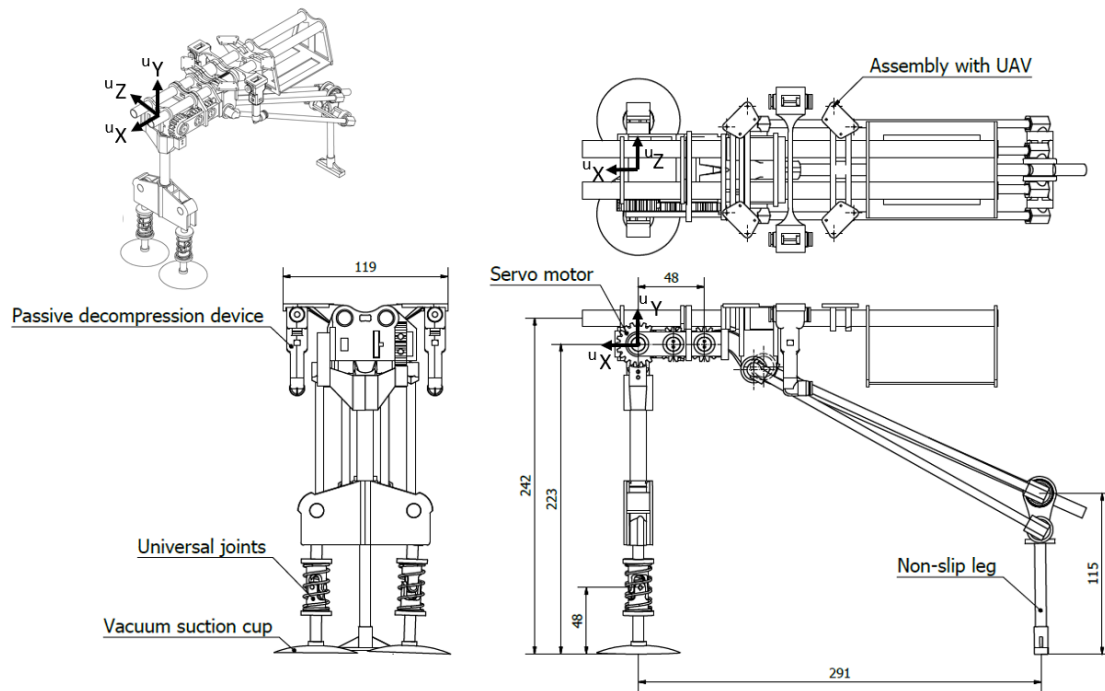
The CAD drawing of the robotic landing gear. A servo motor controls the angle between the front leg and uX axis of the UAV.
